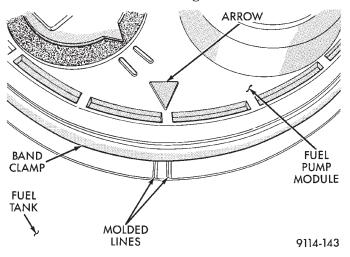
Fuel Pump Module Alignment—All Wheel Drive
